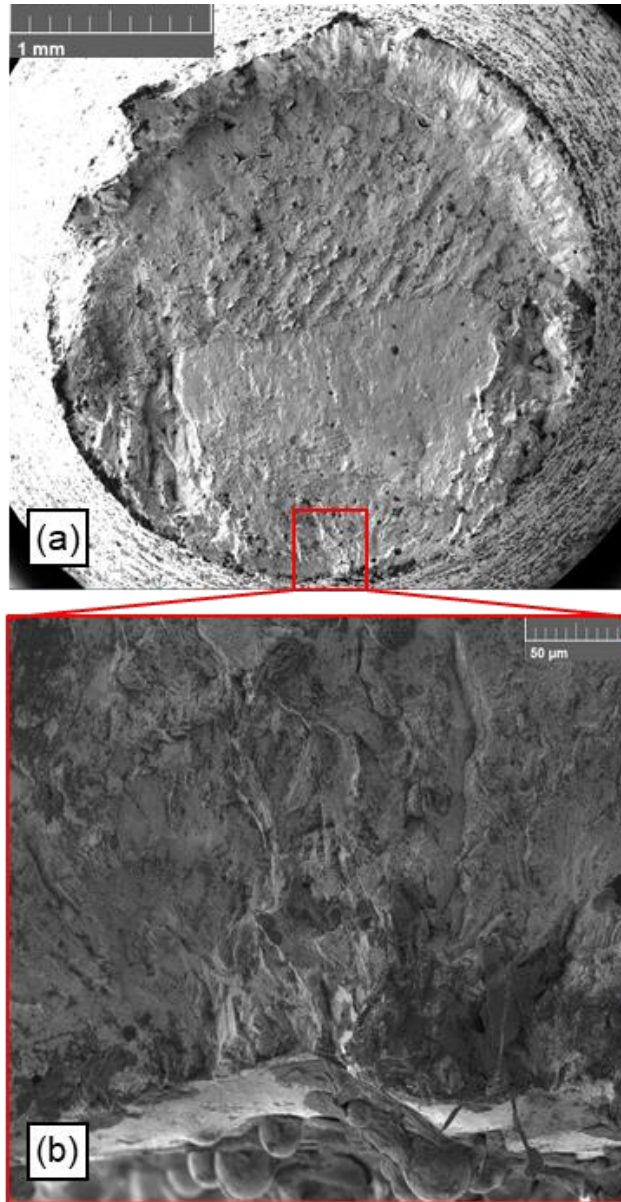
SE fracture surface images of an as-built V LB-PBF Inconel 718 specimen tested at $\sigma_a = 500$ MPa with a corresponding fatigue life of $2N_f = 1.02 \times 10^5$ reversals. The as-built V specimen in (a) failed as a result of surface crack initiation, shown in (b). The crack initiating defect was a slight discontinuity in the geometry, which resulted in a notch on the surface.
